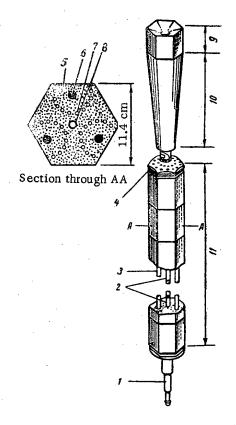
DCDR reactor fuel assembly: 1) positioning rod; 2) positioning pins; 3) fuel element; 4) annular fuel assembly head; 5) graphite; 6) 12.7 mm diameter uranium carbide fuel element; 7) 5.3 mm diameter coolant channel; 8) positioning pin hole; 9) thermal barrier; 10) displacer; 11) fuel assembly sections.
